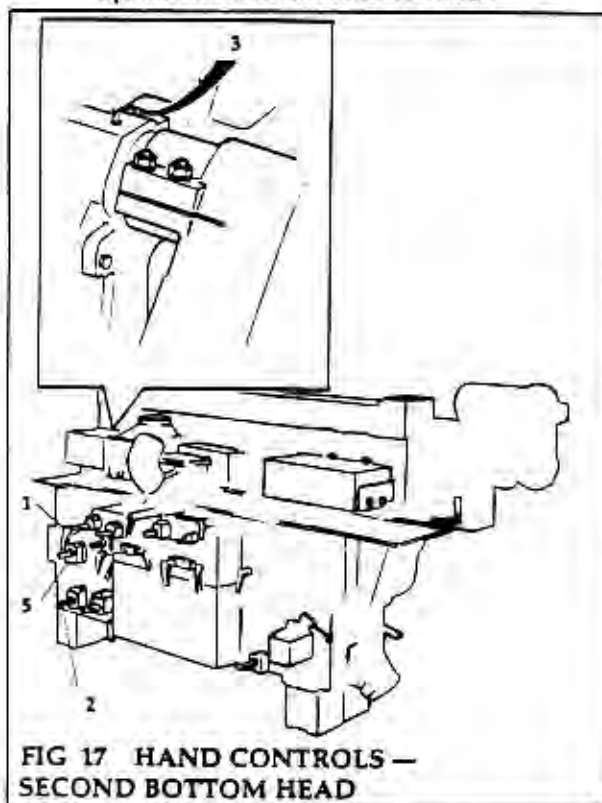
HAND CONTROLS — SECOND BOTTOM HEAD
